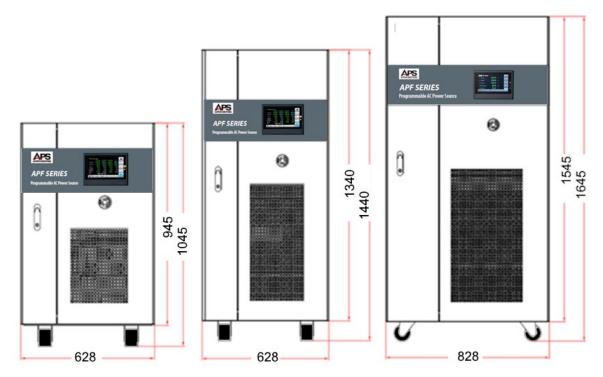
Cabinet Types 1, 2 & 3 Dimensions
